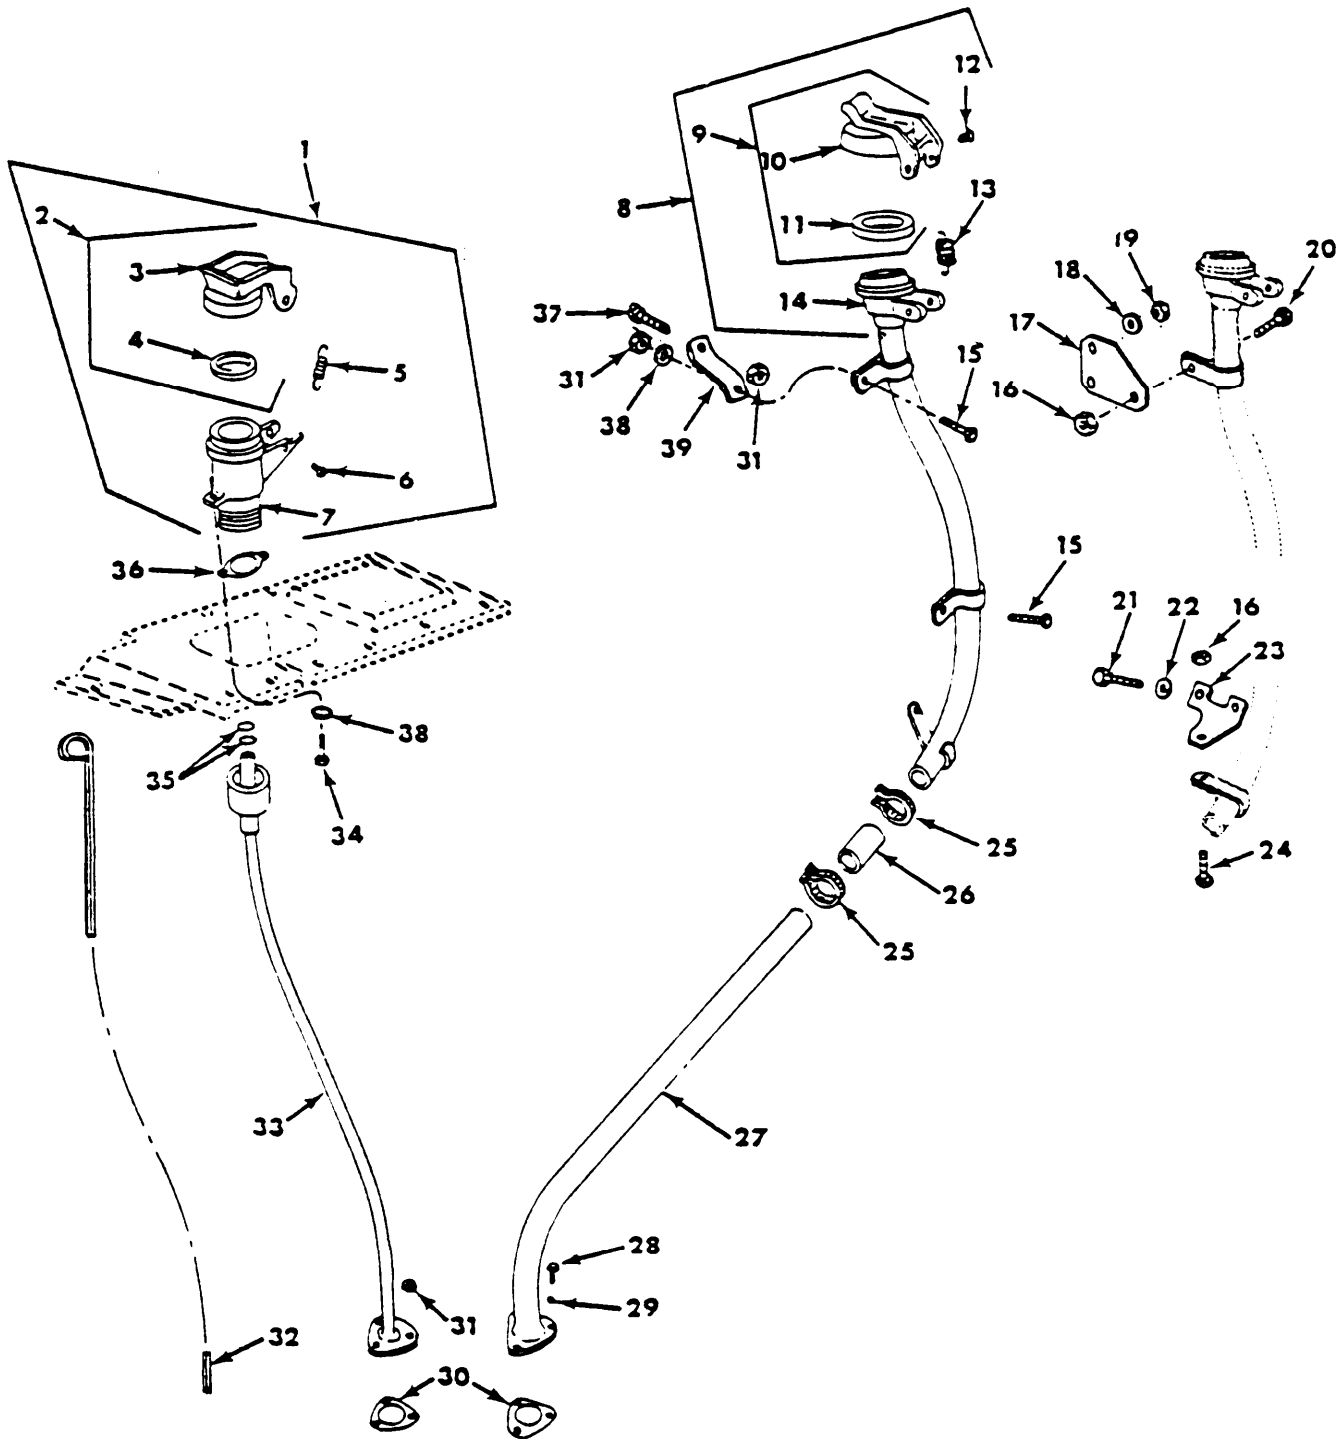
OIL GAGE ROD TUBE, OIL FILLER TUBE, AND RELATED PARTS.
